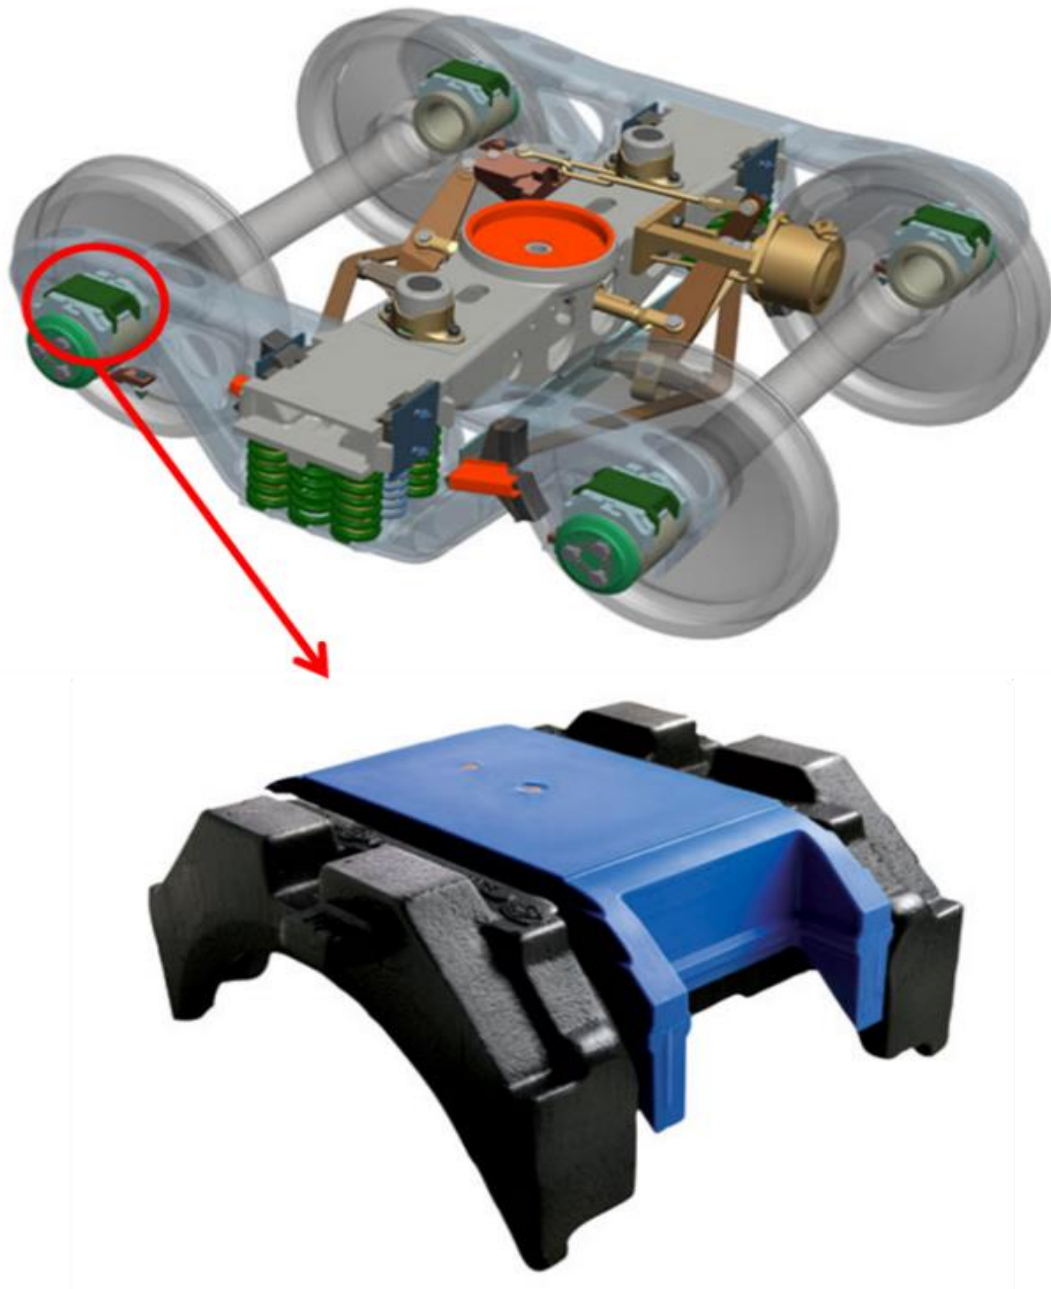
Configuration and location of AdapterPlus™ with thermoplastic elastomer steering pad (Blue) within wheel-axle-bearing assembly of the freight car suspension system [5].
